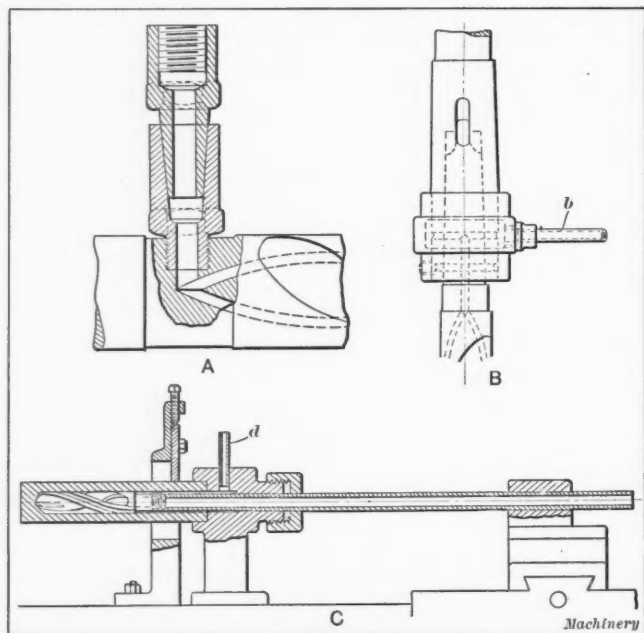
A, Connection to Oil Passages of Stationary Drill; B, Connection to Oil Passages of Rotating Drill; C, Method of lubricating Hollow Drill for Deep Hole Work
